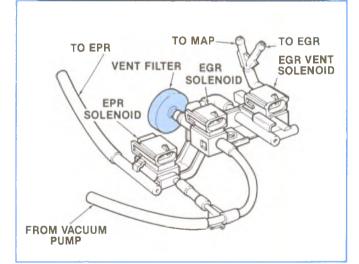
, EGR, EPR, Vent Solenoid Assembly.
